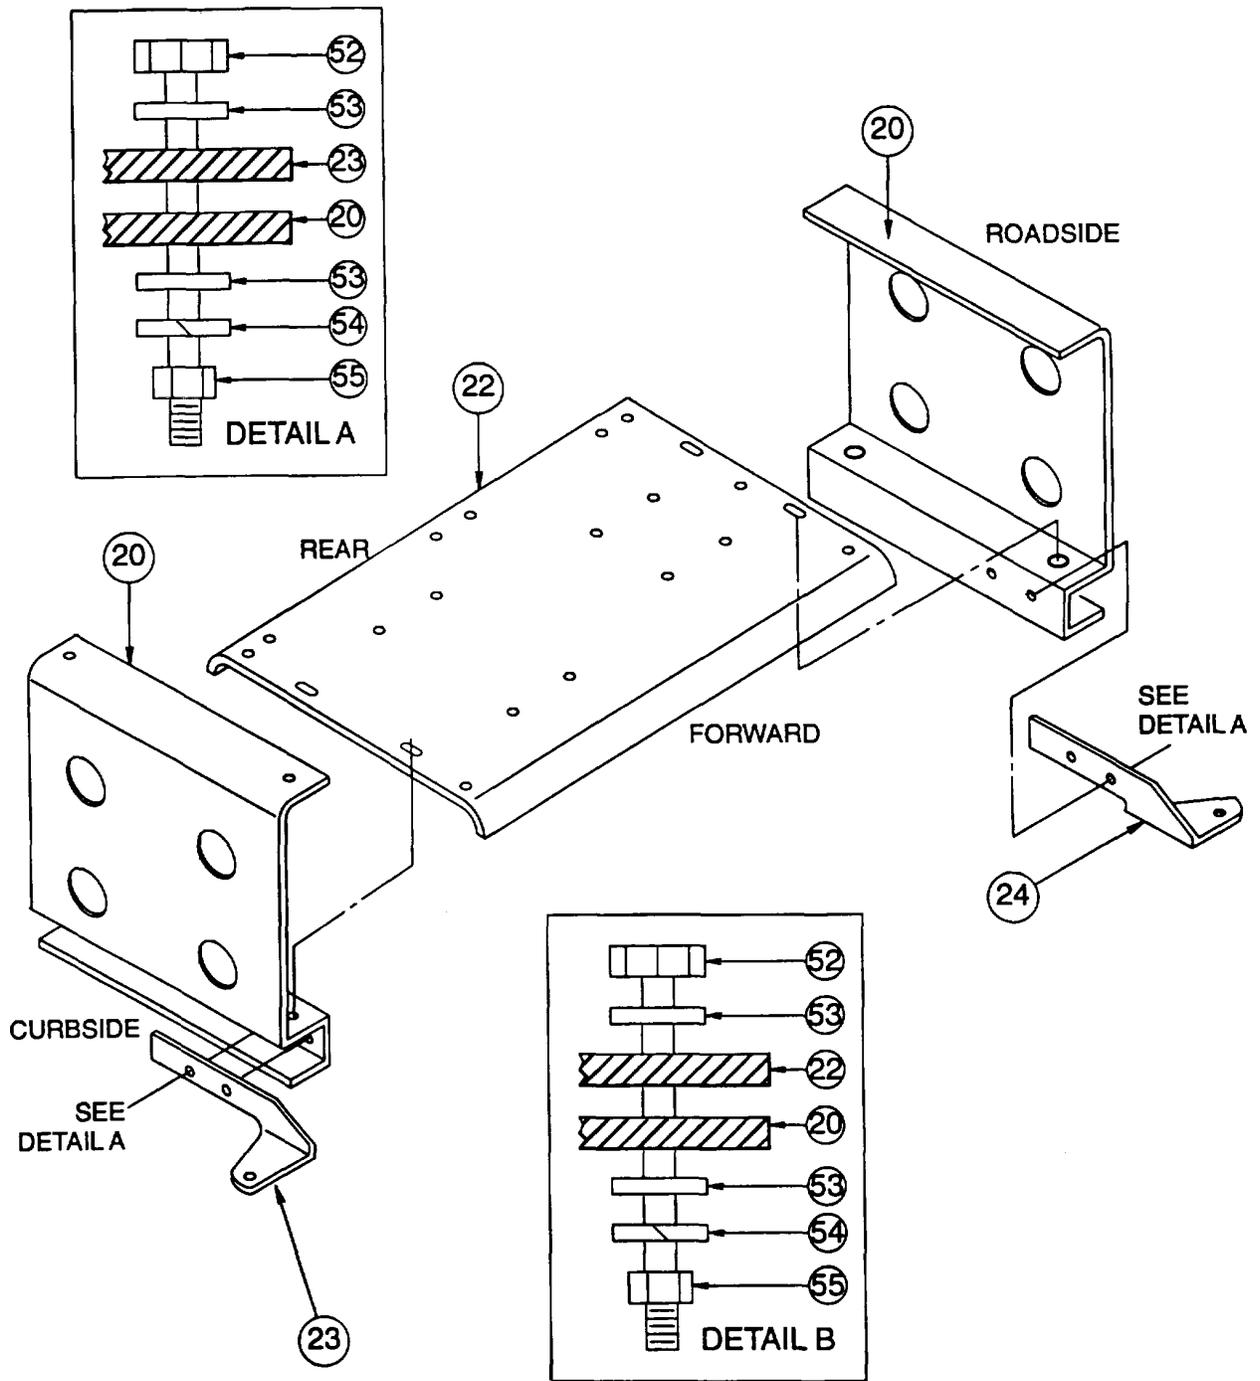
Radio Rack Bottom Shelf and Side Brackets Assembly
